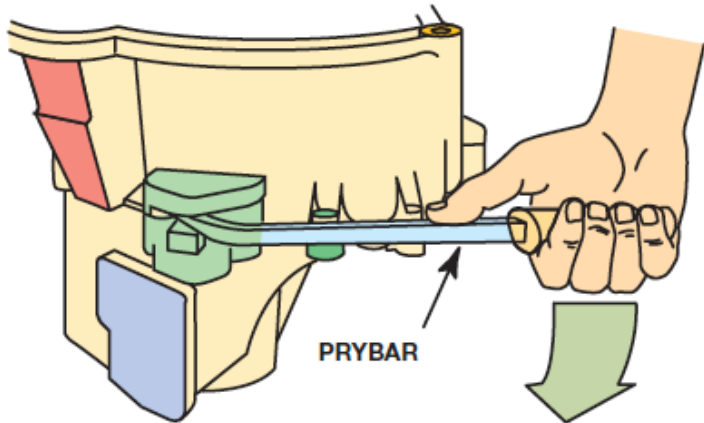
Most transaxles use formed-in-place gaskets that tend to glue the case and covers together. This unit has a slot to allow prying without damaging the gasket surfaces.
